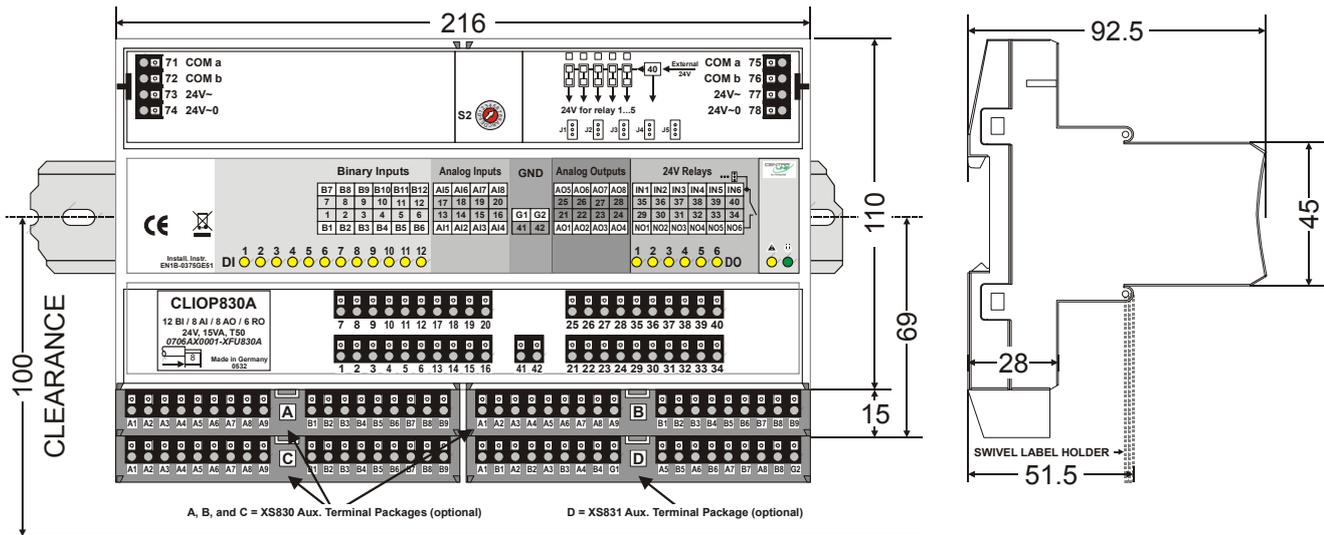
CLIOP830A mixed Panel Bus I/O module (shown with 4 auxiliary terminal packages), dimensions (in mm)
